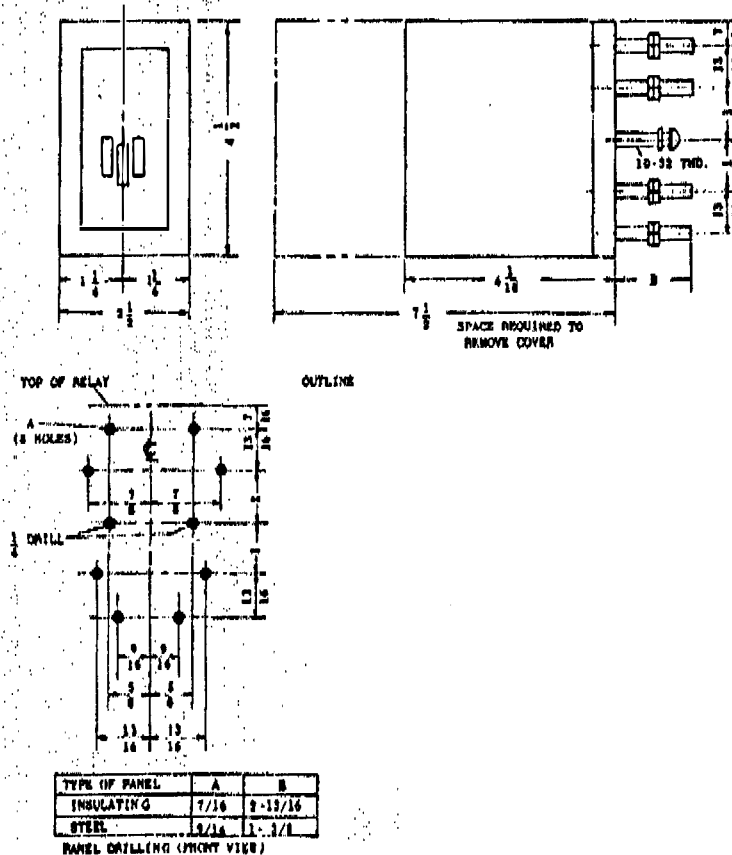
(0148A3979-2) Outline And Drilling Dimensions For The Projection Mounted NGV17A Relay
